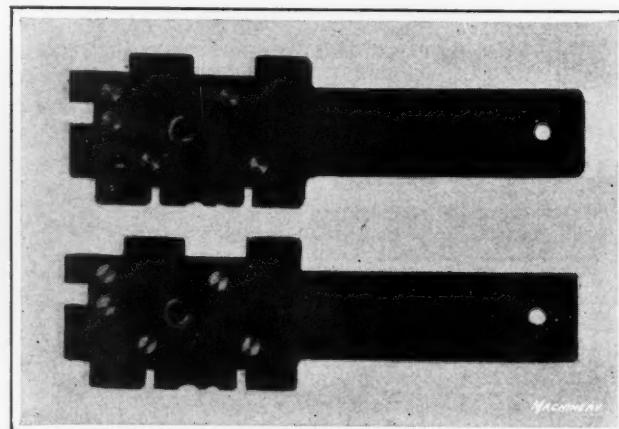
Improved Type of Snap Gage in which Blocks or Filler Pieces are used in the Gaging Notches to take Care of Wear or Changes
